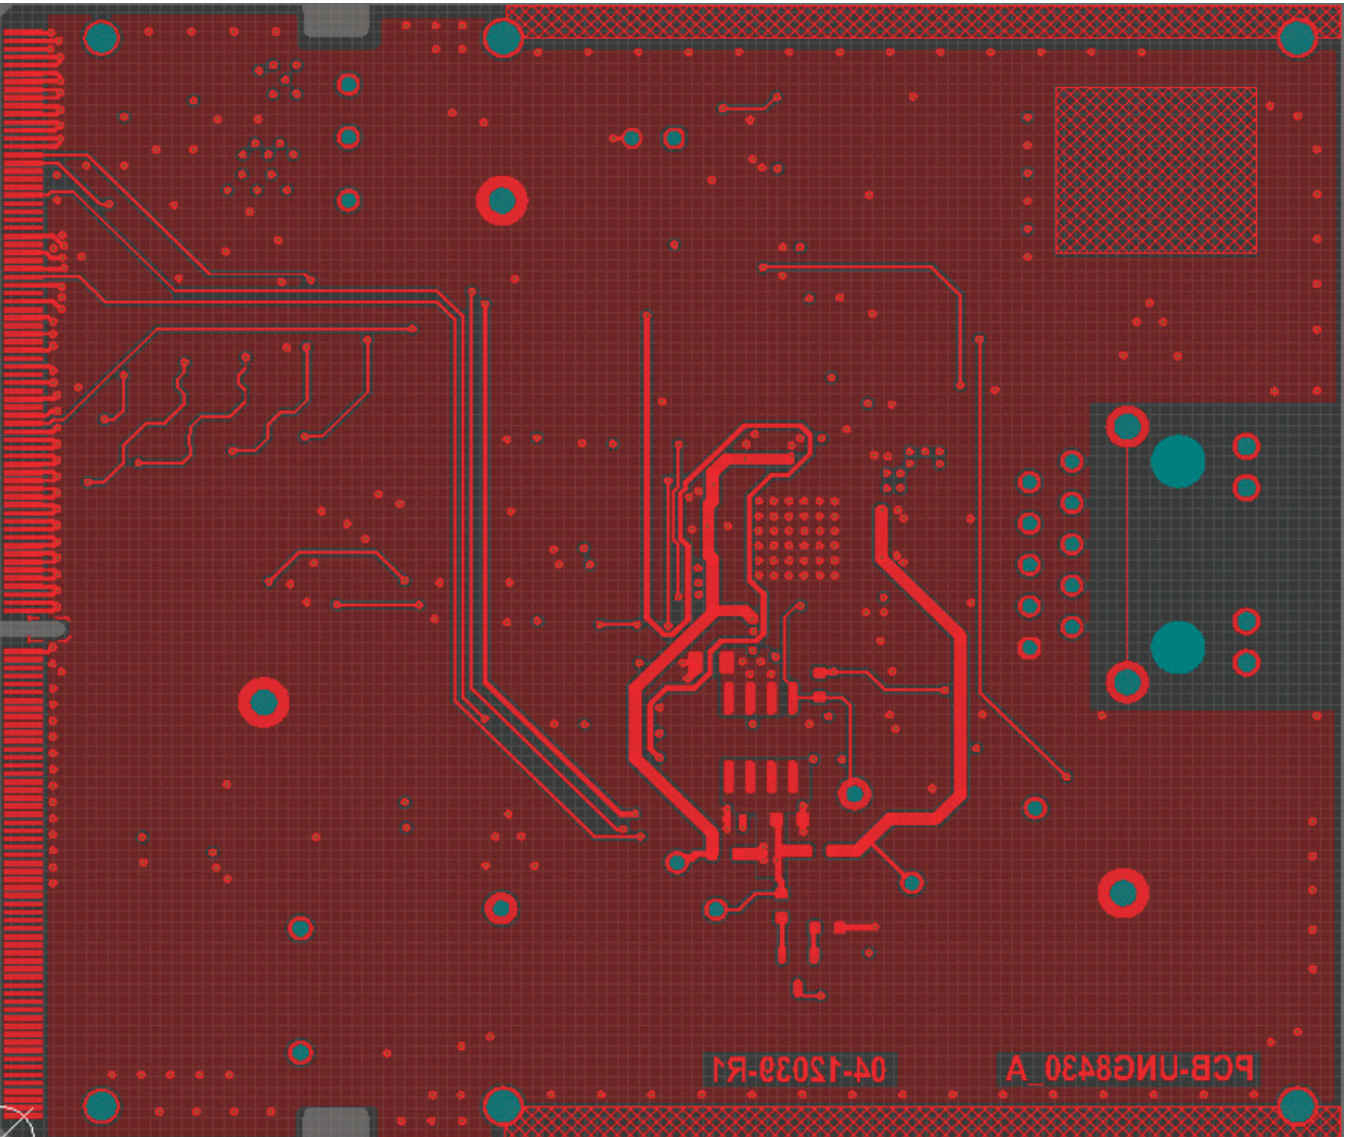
KSZ9131 EDS2 DAUGHTER CARD BOTTOM SILK
